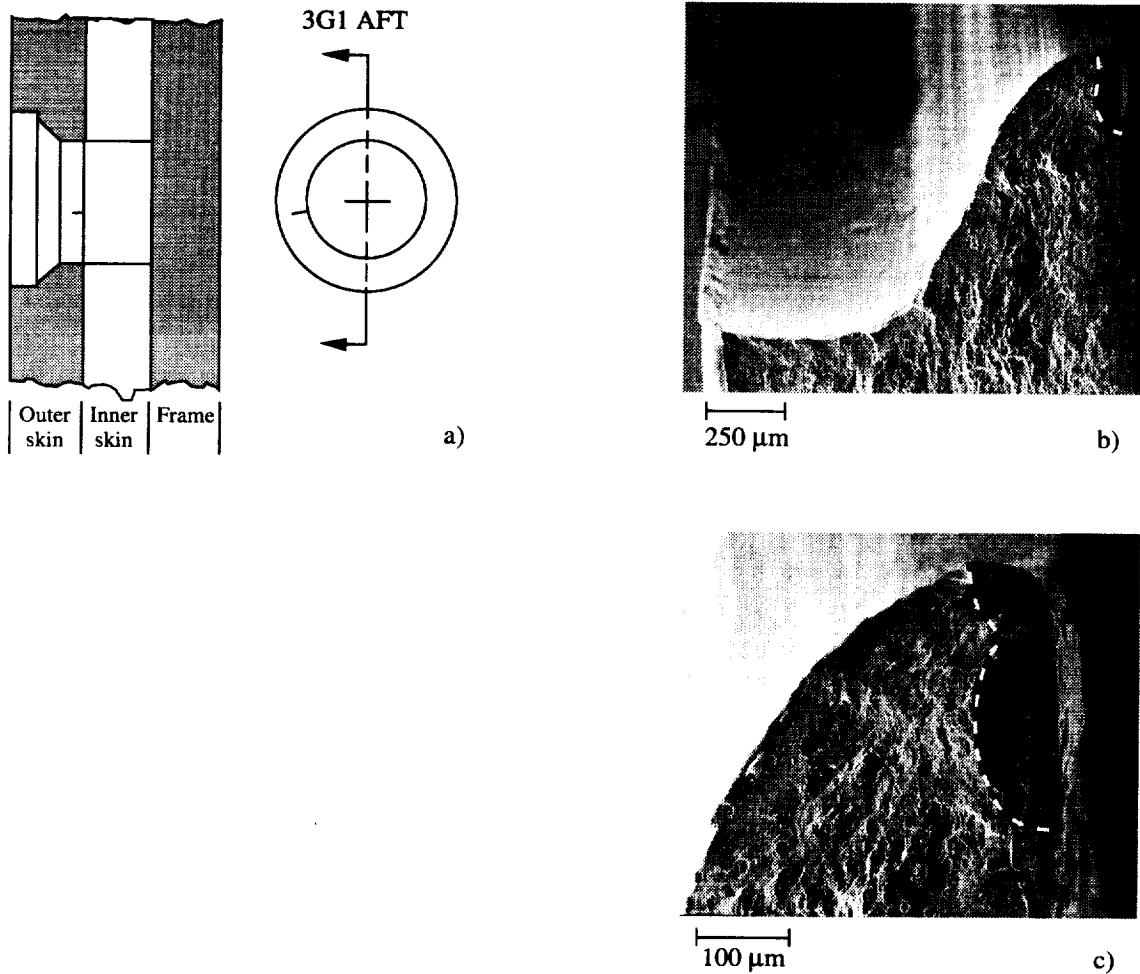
a) The schematic shows the rivet hole 3G1 configuration and the location of the outer skin fatigue crack oriented in the aft direction below the 9 o'clock position. b) The SEM micrograph shows the fatigue crack at the rivet hole faying surface. The dashed line marks the fatigue crack front. c) The SEM micrograph shows the fatigue crack region at high magnification. The dashed line marks the fatigue crack front.
